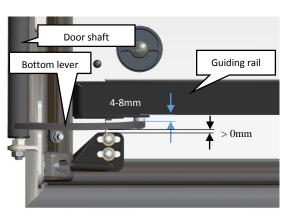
Guide roller on the door shaft bottom lever Figure 1.12: Space between the bottom lever and rails
